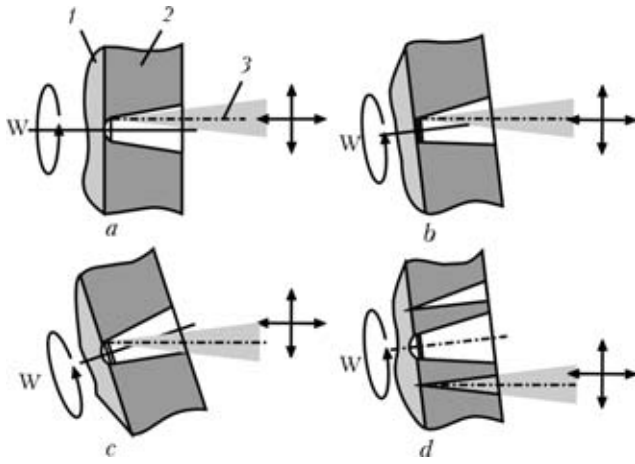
Nozzle forming stages: *a* – manufacturing of inlet cone: 1 – base; 2 – workpiece; 3 – caustic surface; *b* – cylindrical part; *c* – back cone; *d* – direct cutting of workpiece
